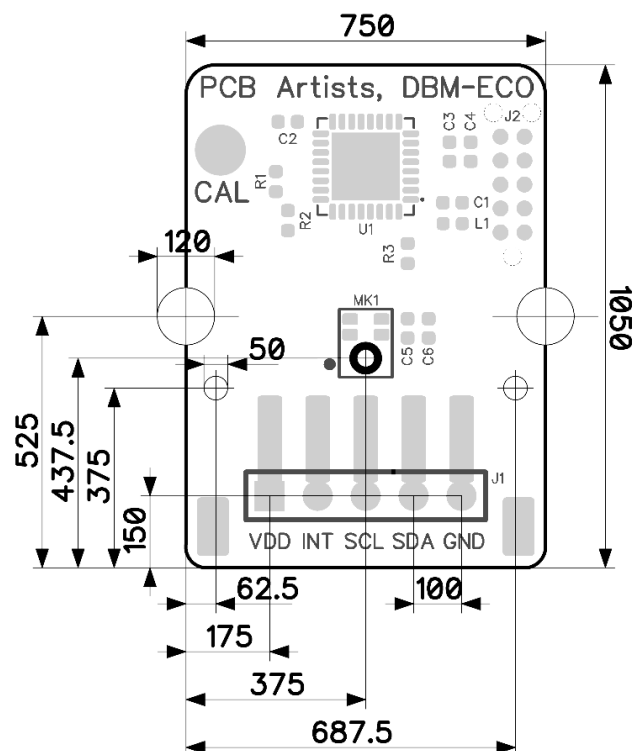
PCBA-DBM-Eco Dimensions (unit: mil)
